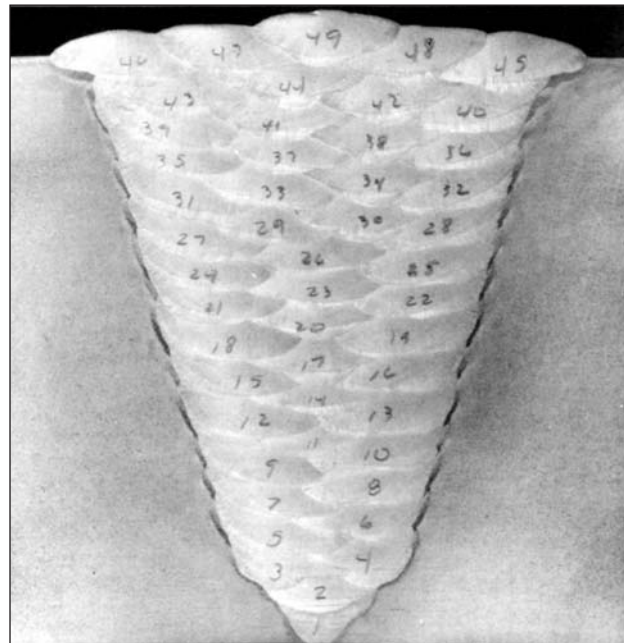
INCONEL alloy 600 joint 3-in (76-mm) thick completed with 0.062-in. (1.6-mm) diameter INCONEL Filler Metal 82 and INCOFLUX 4 Submerged Arc Flux (numerals indicate sequence of bead placement).
